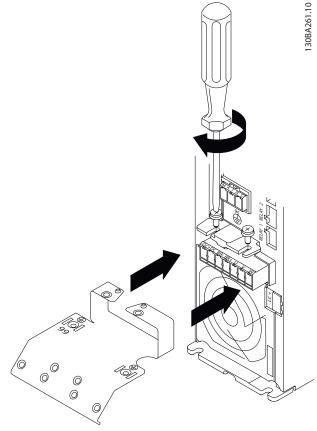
Mount the 2 screws in the mounting plate, slide it into place and tighten fully
